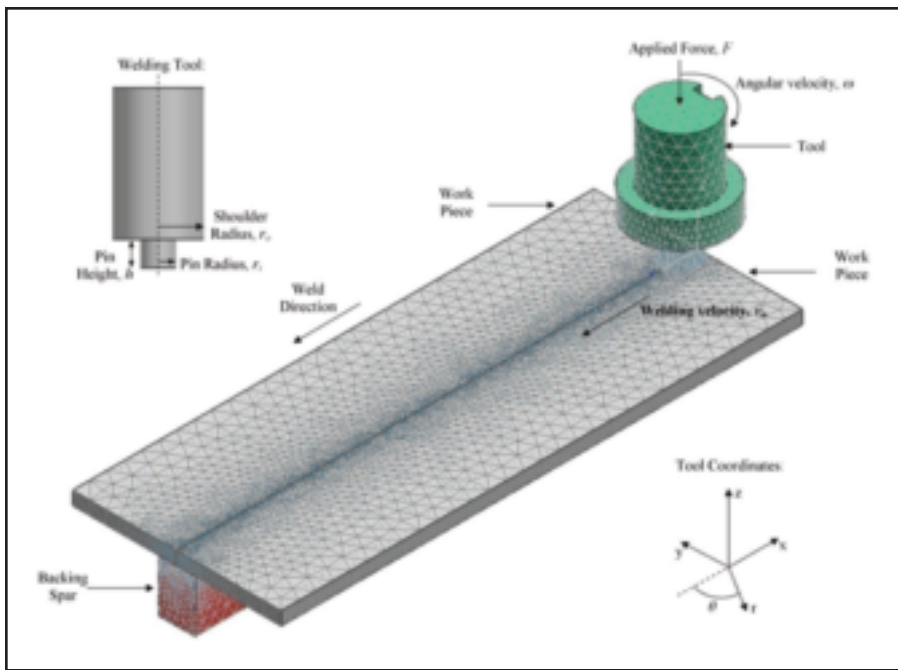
Friction stir weld configuration, tool coordinate system, and tool geometry.
